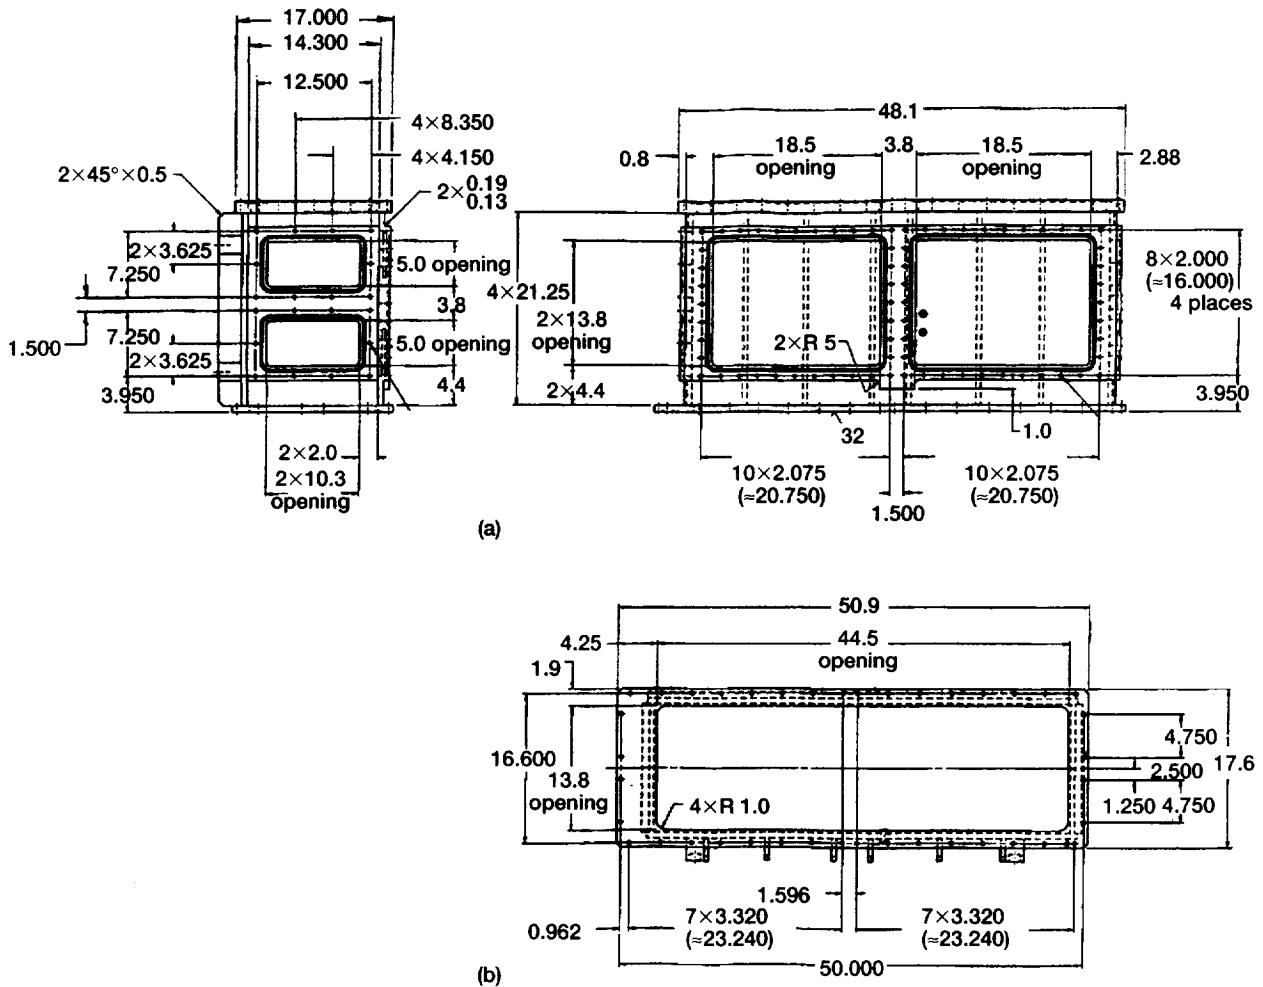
Exhaust Plenum. All dimensions are in inches. (See ref. dwg. R-58005M77A112 for details, available from the project engineer.) (a) Plan view. (b) Elevation view.
